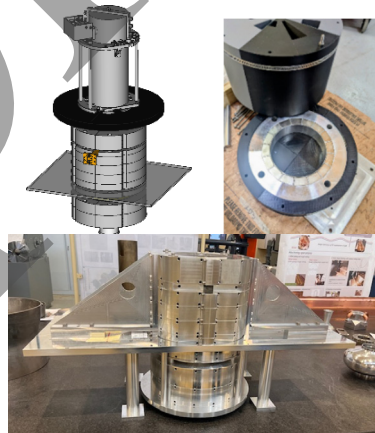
Assembly of the prototype. Top left: model of the total klystron/solenoid system including the oil tank interface. Top right: Assembly of one of the ring PMs. Bottom: mechanical frame made of aluminium.
